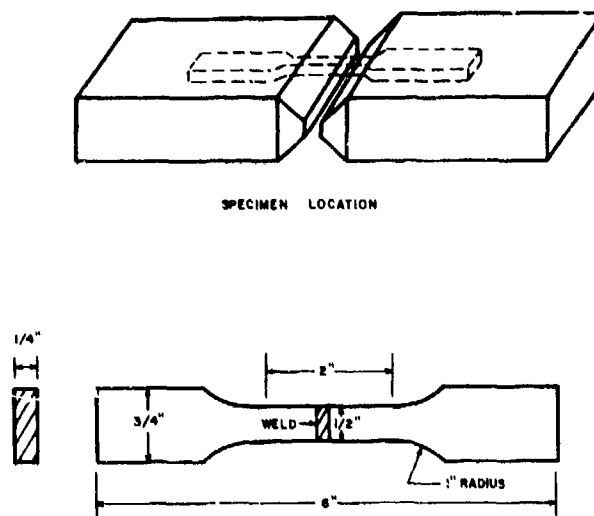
Specimen geometry for tensile, fatigue, and Charpy impact tests of welded ASTM A-514 steel.
